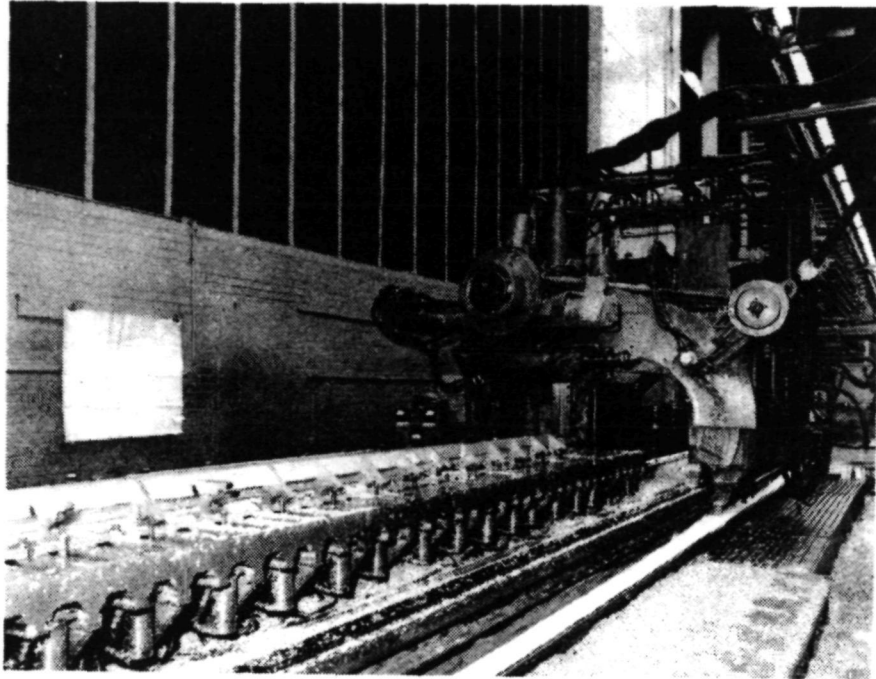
STRINGER BEING MACHINED ON NUMERICALLY-CONTROLLED MACHINE TOOL
